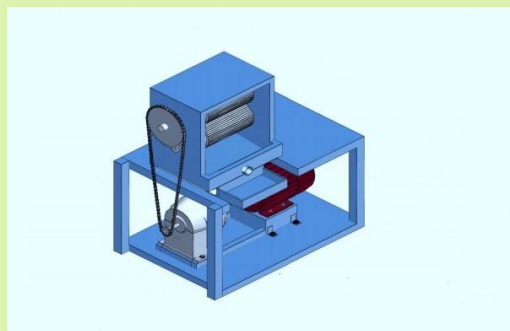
Detailed and Exploded Design of Sugarcane Juice Extracting Machine
